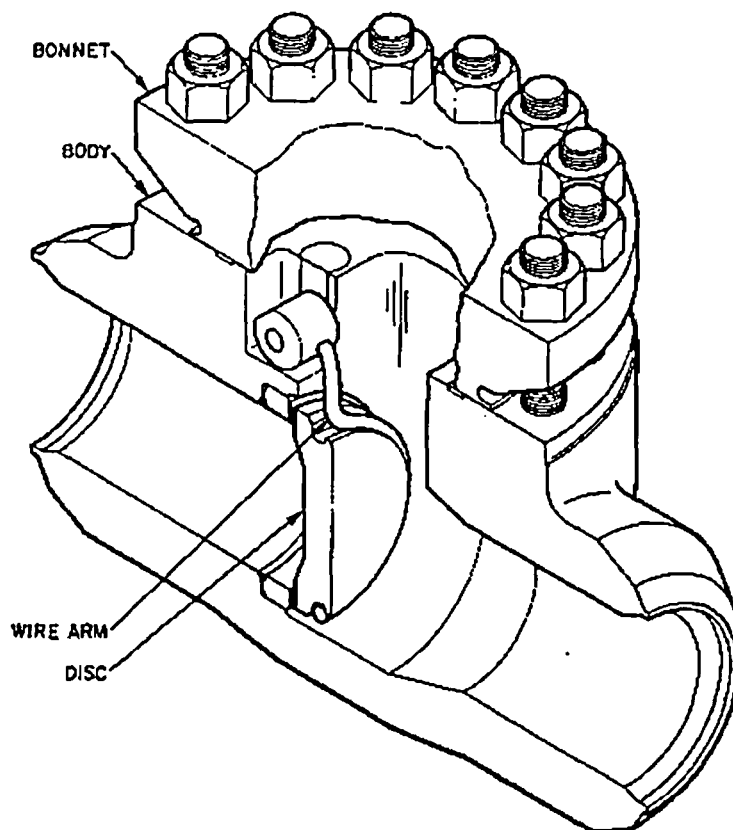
Westinghouse Style B Swing Check Valve Models 03001CS88 and 04001CS88
